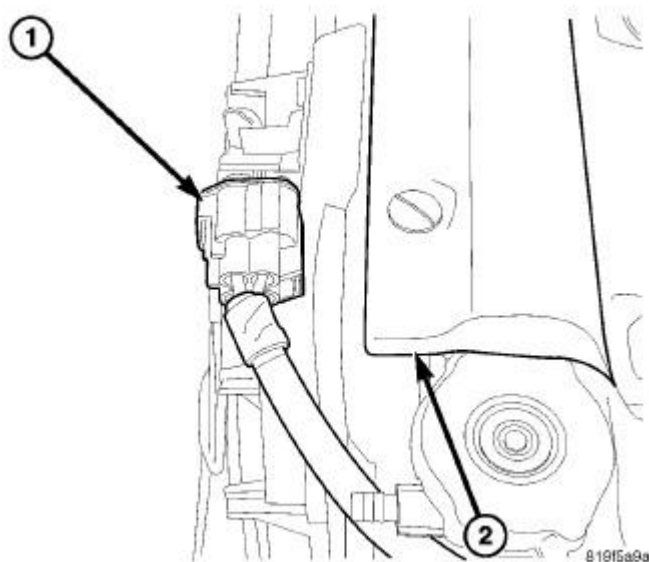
Radiator Fan Electrical Connector & Upper Radiator Seal
